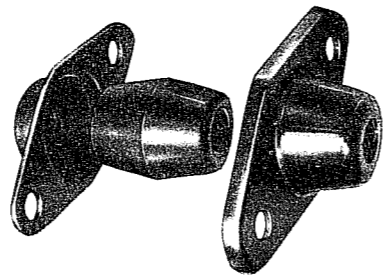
Exploded view of the rear compensating spring. - Swing axle.
